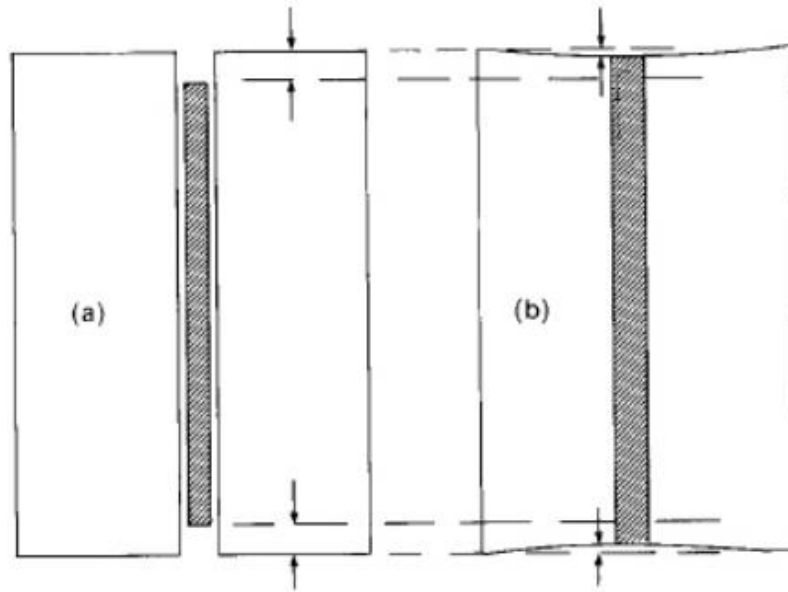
Formation of residual stress in welds: (a) before welding and (b) after welding [28].
